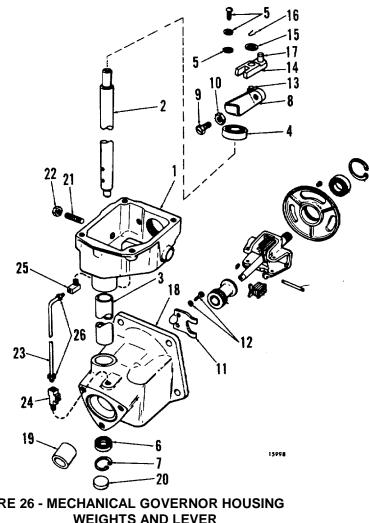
MECHANICAL GOVERNOR HOUSING WEIGHTS AND LEVER (3, 4 CYLINDER ENGINE)
